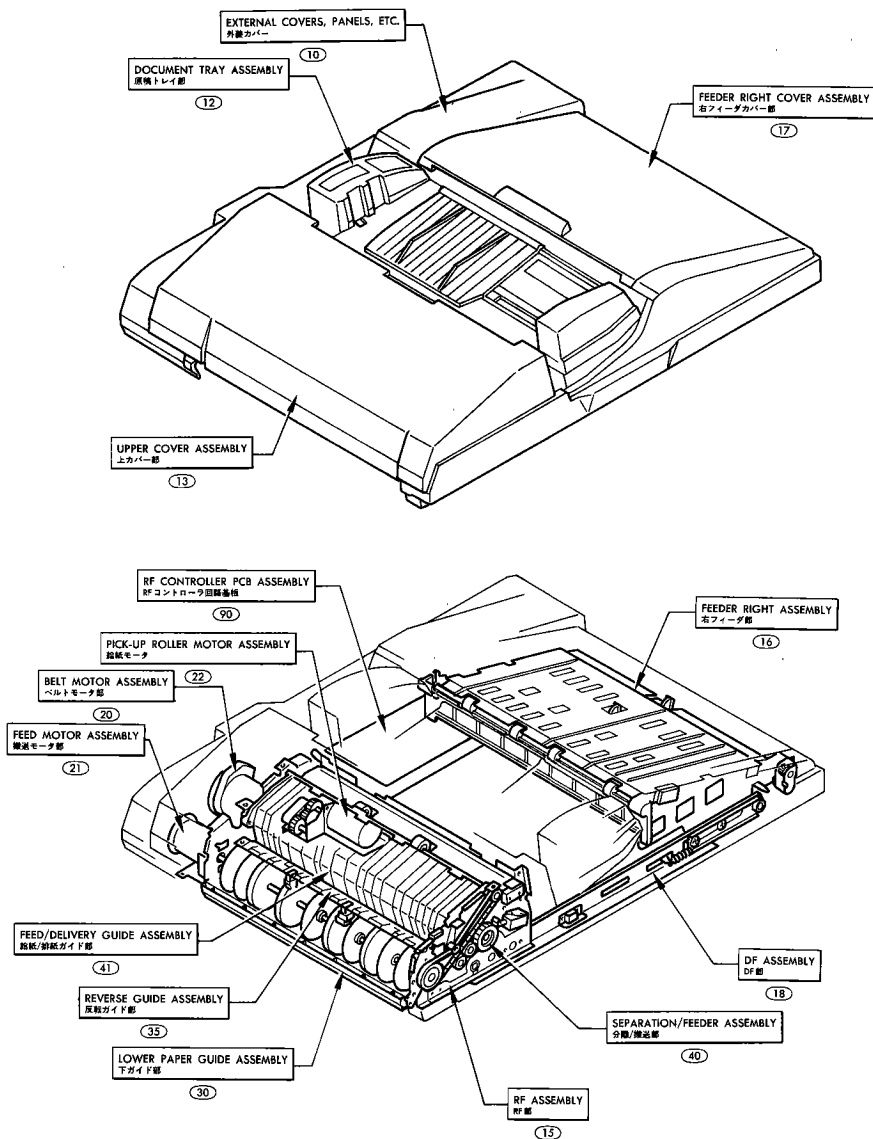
FIGURE A ASSEMBLY LOCATION DIAGRAM (2/2)
